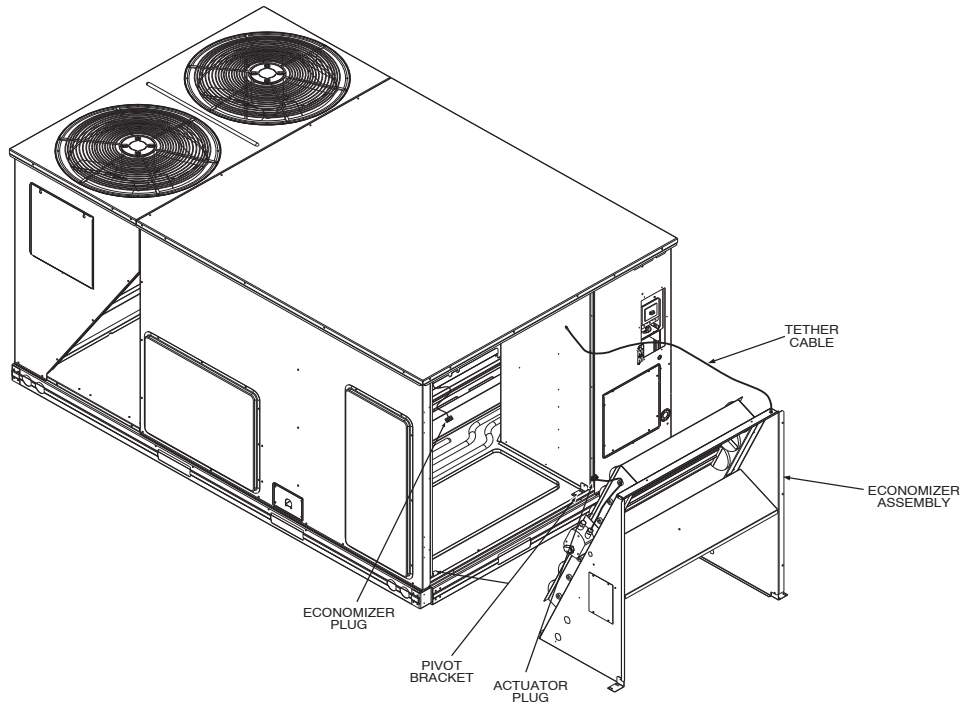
Installing Vertical Economizer Assembly (Sizes 08-14 Shown)
